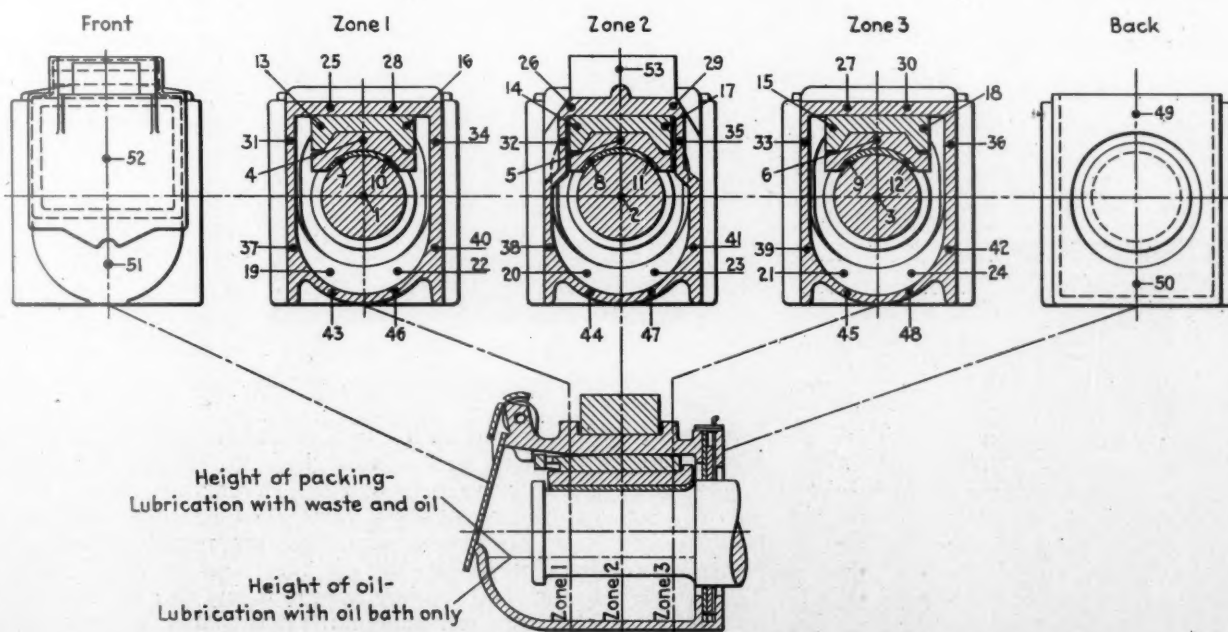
Location of thermocouples in standard railway journal-box assembly
